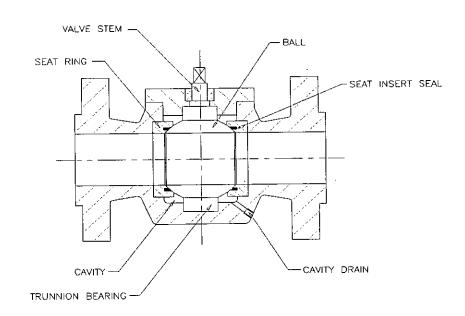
SECTION VIEW - TYPICAL BALL VALVE
